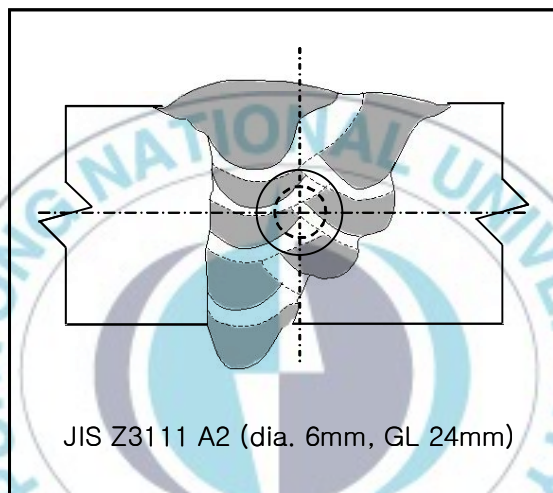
Schematic diagram showing location of tensile test specimen in weld metal
